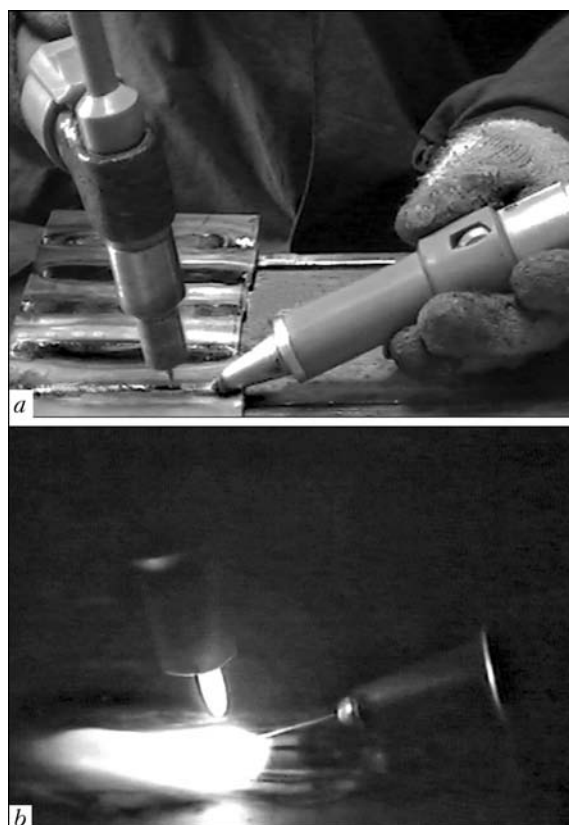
Welding procedure using semi-automatic welding device M30: *a* – position before welding; *b* – welding process
